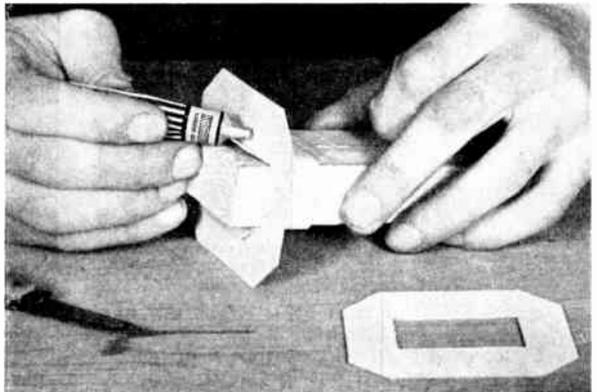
CONSTRUCTING THE TRANSFORMER BOBBINS.
